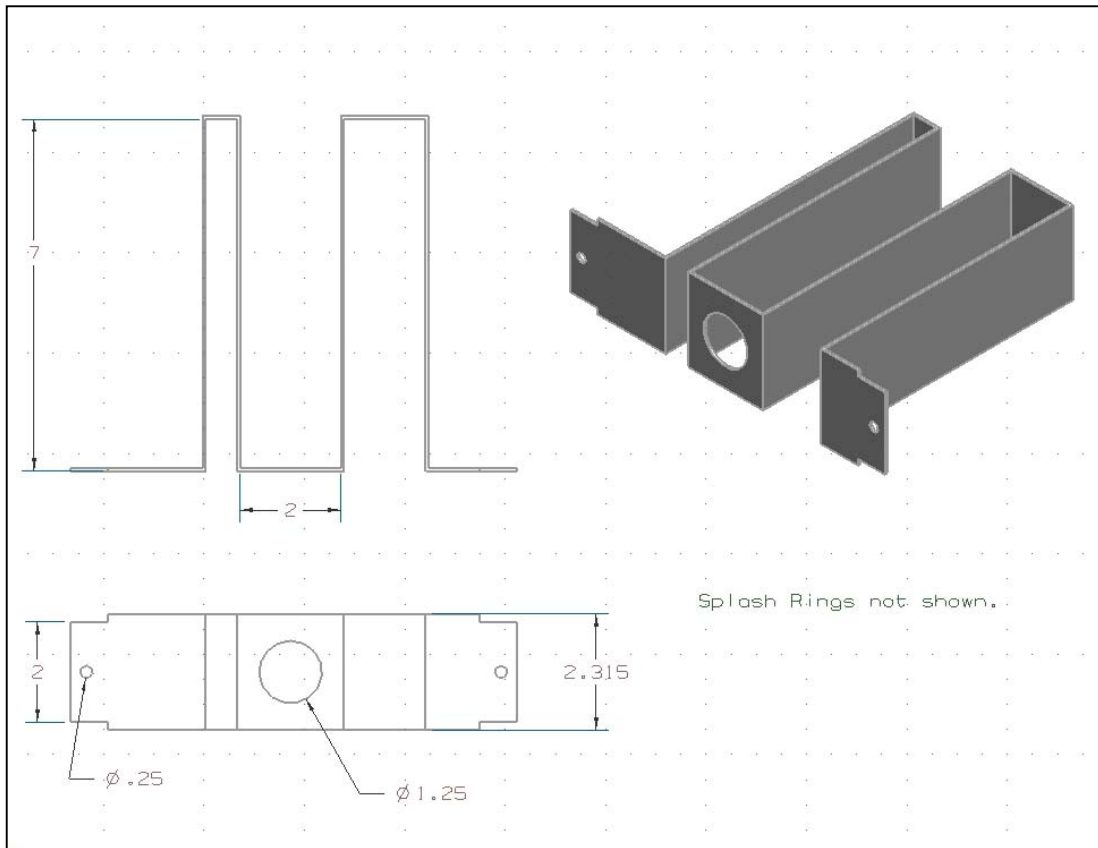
TOP, FRONT, and ISO view of Liner Section used for Testing.
